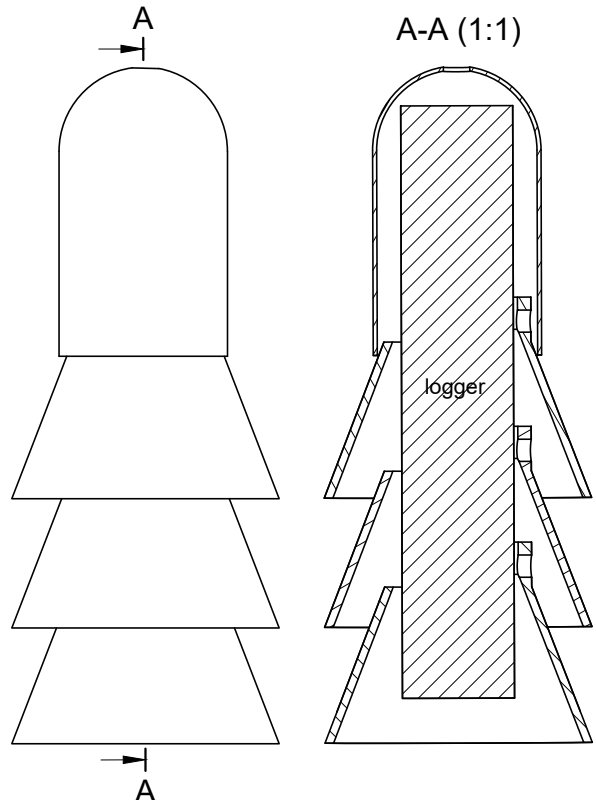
Technical drawing displaying the cross-section of the logger cover design used.
